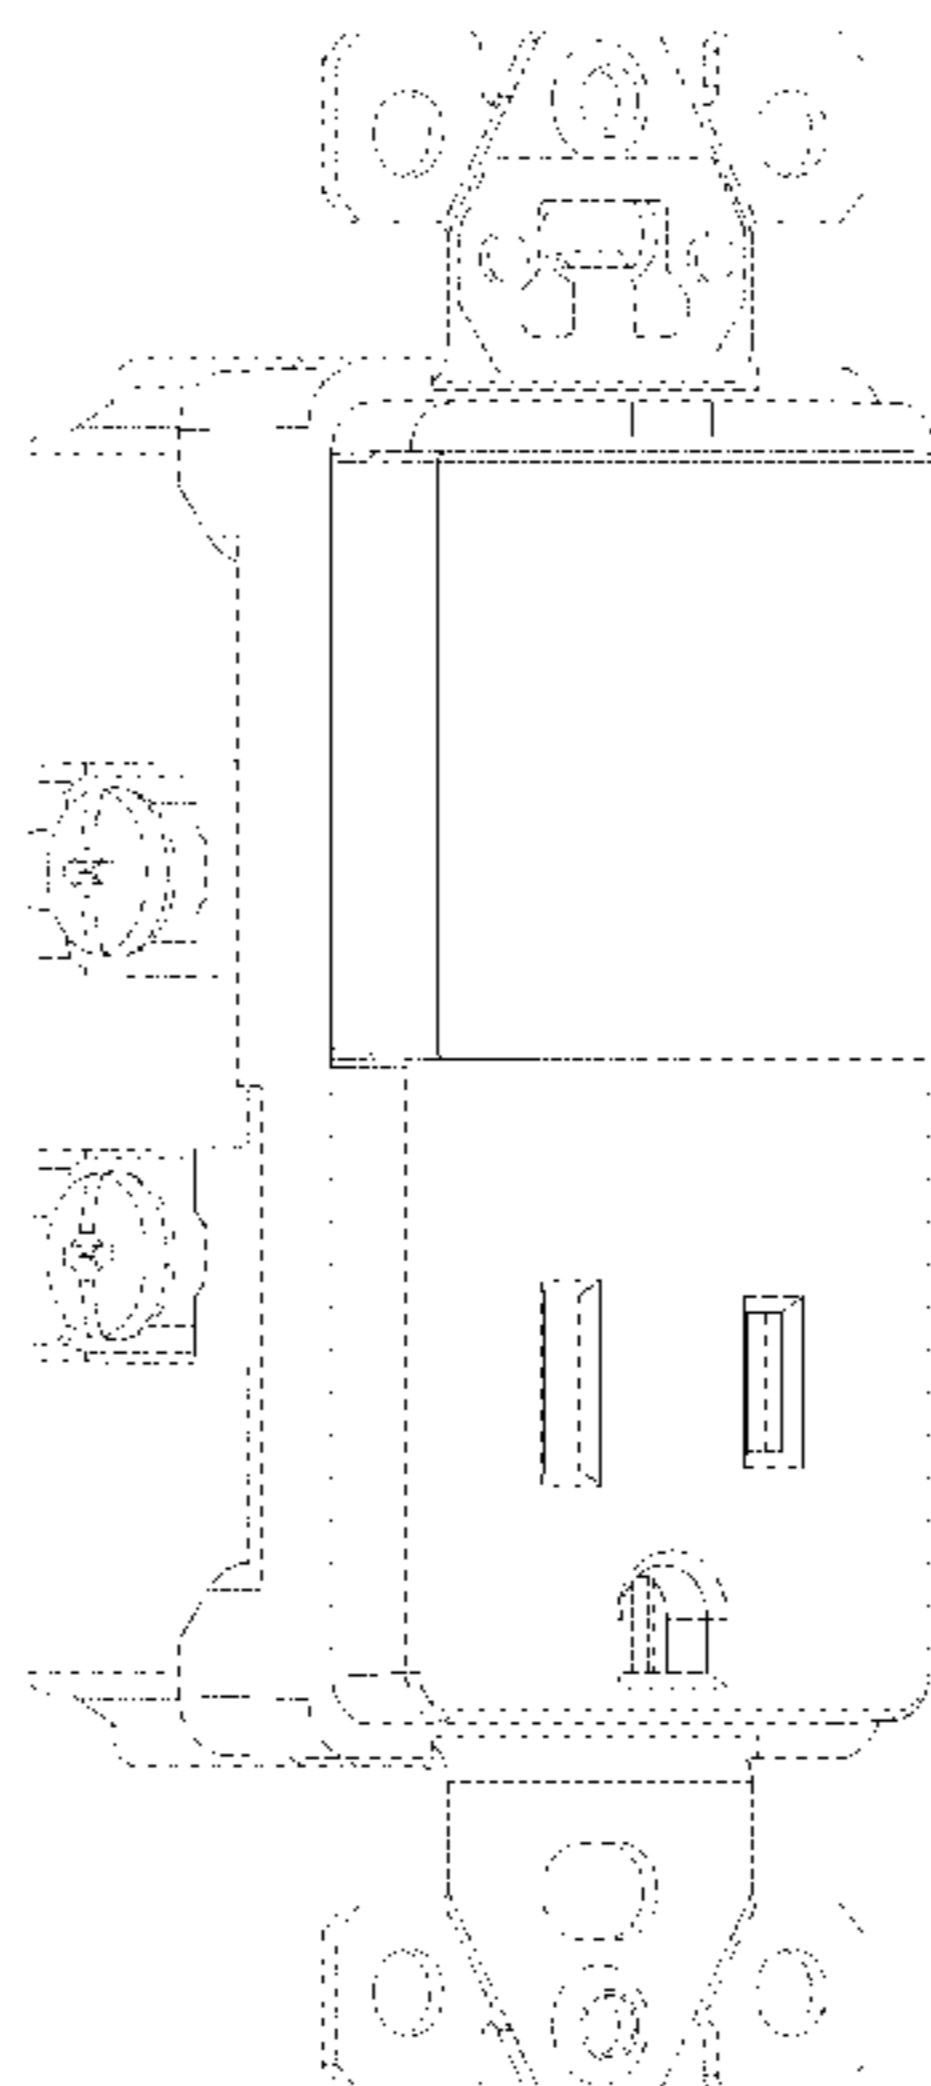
is a right side view of the embodiment shown in FIG. 8.
